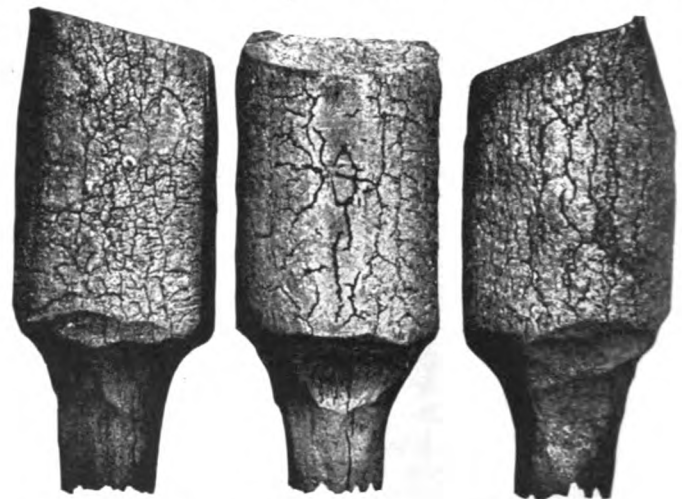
Crazy cracks in valve forgings revealed by pickling.
